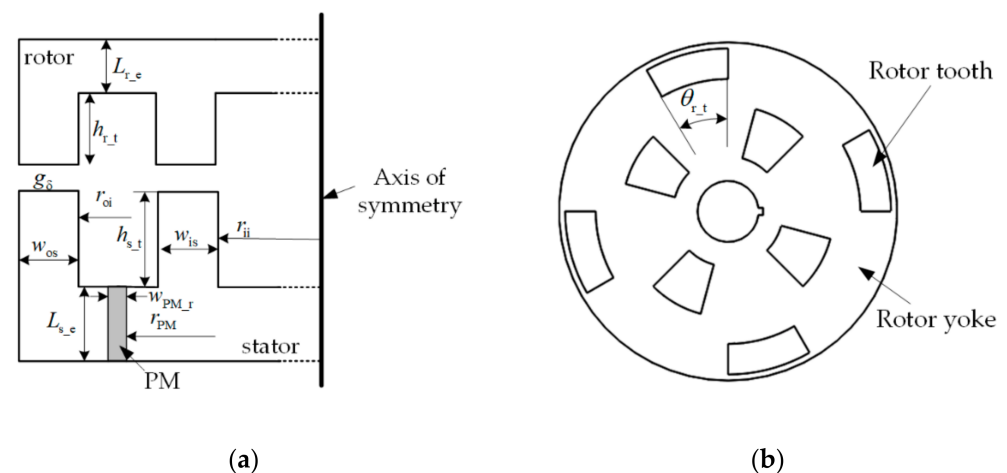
The dimension parameters of the 6/4 FSPM machine: (a) cross-sectional view; (b) vertical view of rotor.
